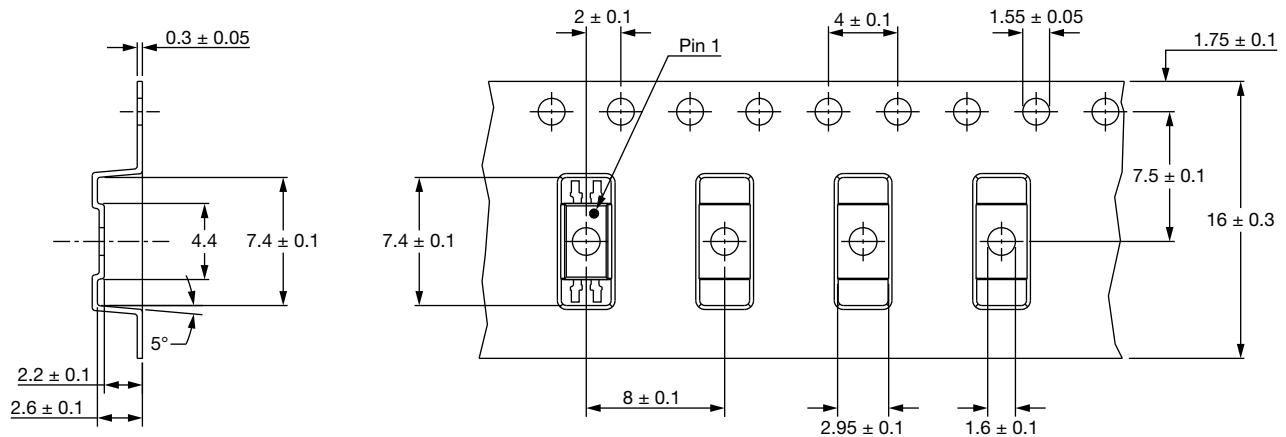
Tape and Reel Packing (3000 parts per reel)
